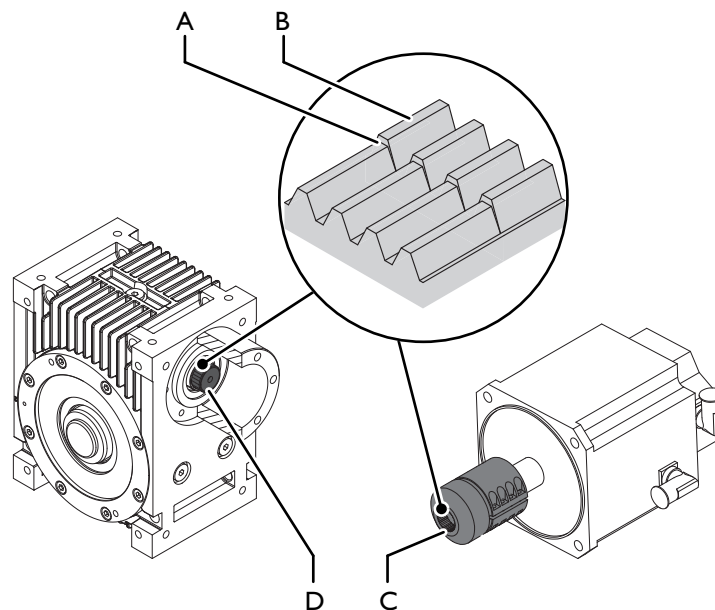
Checking gear teeth of the coupling and the worm shaft
